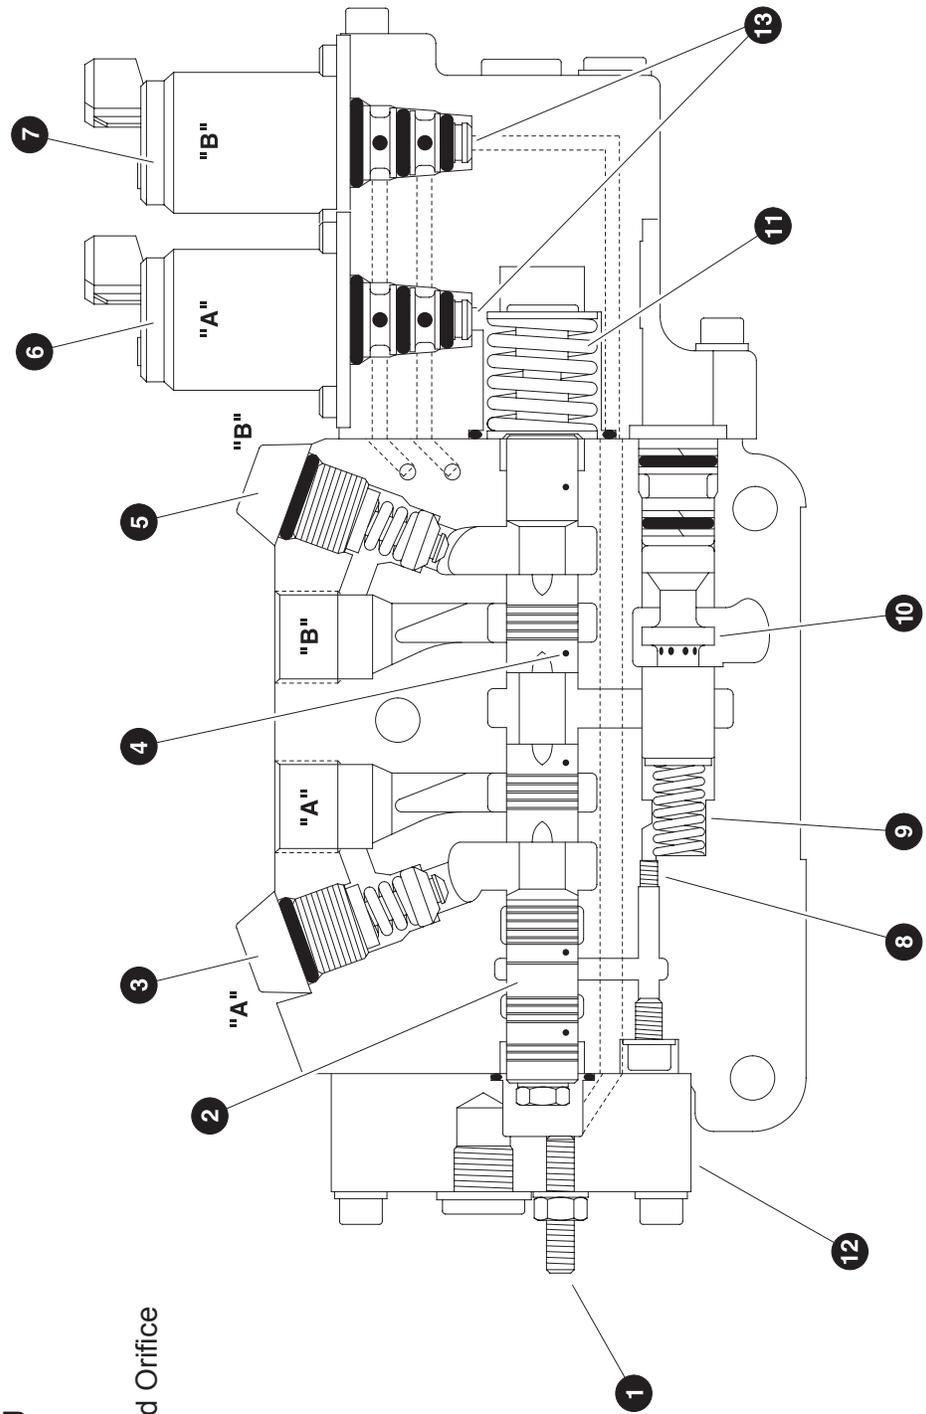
Implement Control Valve Spool Section Cut-Away - LS90
